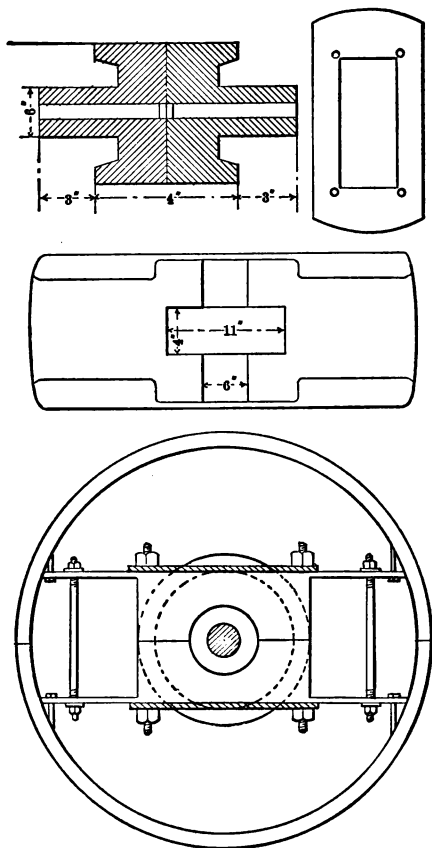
Clamping a Pulley over a Flange Coupling.
